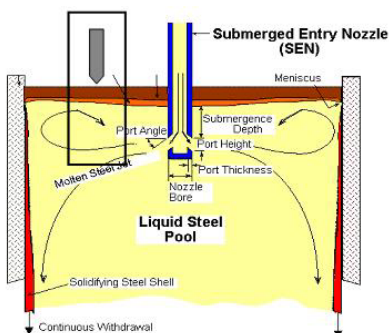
Continuous casting mold showing steel flow, top-surface slag layers, and location of nail-board insertion
